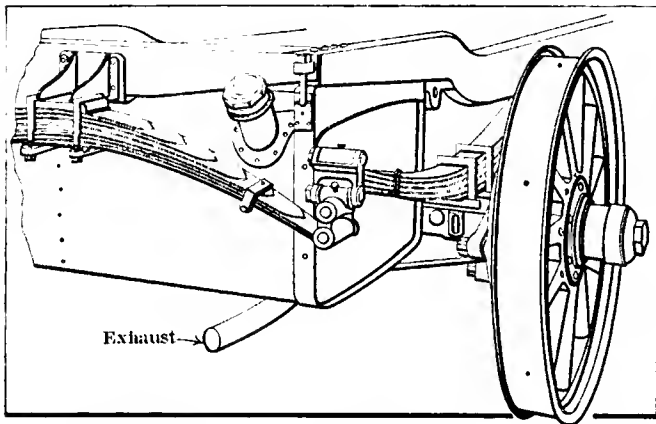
Exhaust pipe passes under gasoline tank in rear, demanding that it be well secured to prevent whip-sawing
